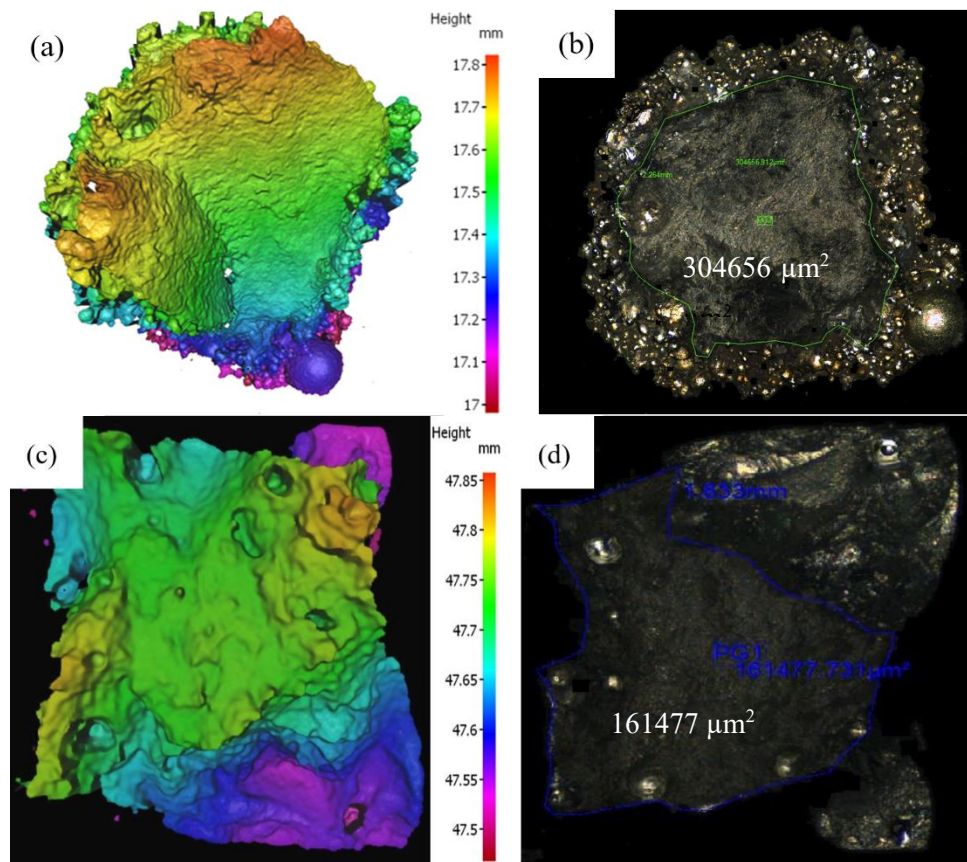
Fracture surface of B2 as-built specimen (a) 3D surface profile (b) failure region marked (0.30 mm<sup>2</sup>); polished specimen (c) 3D surface profile (d) failure region marked (0.16 mm<sup>2</sup>).
